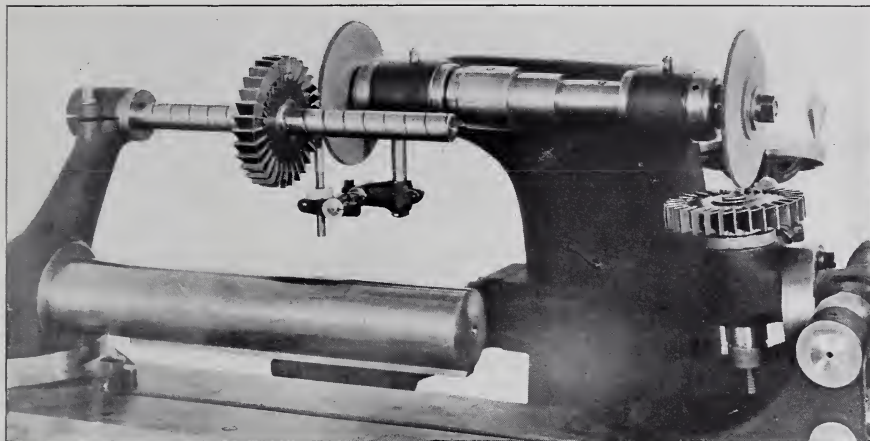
NEW CUTTER AND REAMER GRINDING MACHINE MADE BY THE BECKER-BRAINARD MILLING MACHINE CO., HYDE PARK, MASS.
